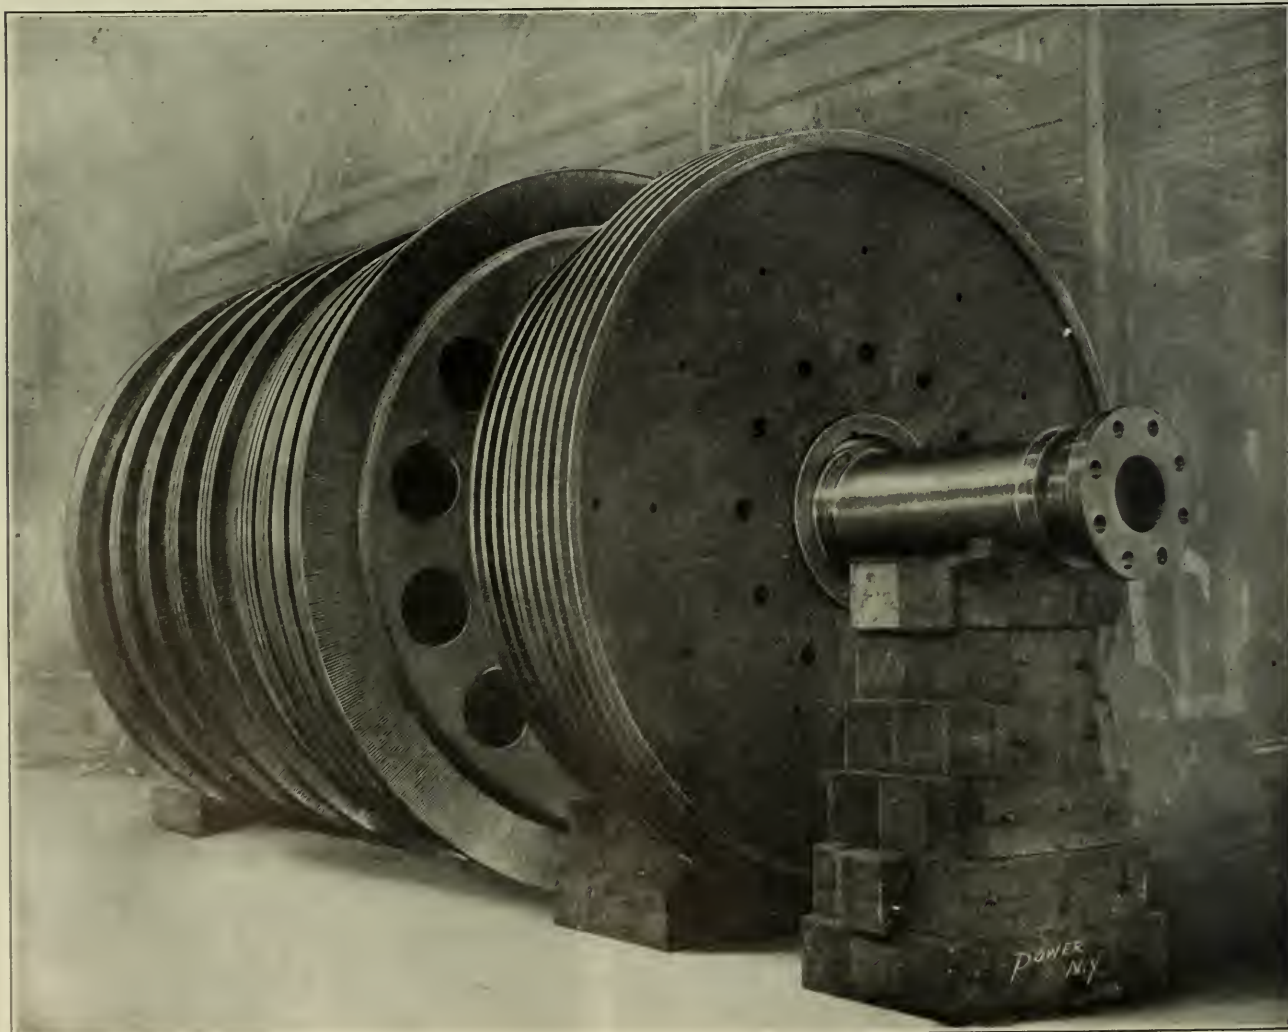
ROTOR, SHOWING REVERSE WHEELS
